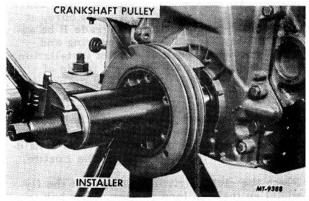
Installation of Crankshaft Pulley Using SE1900 Installer
